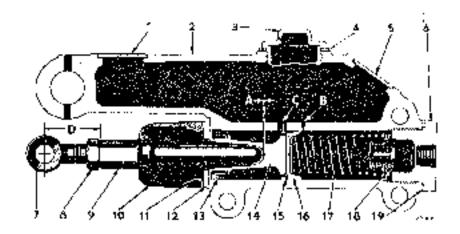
Brake Master Cylinder (Assembled View) (1942 Madel)
